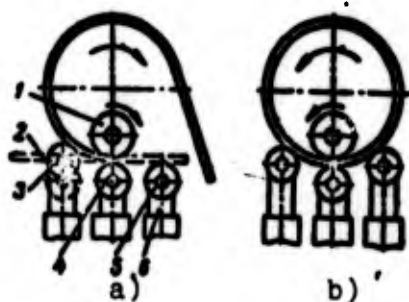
Diagram of the operation of a profile bending machine: 1 - drive roller; 2 - billet; 3, 5 - bending rollers; 4 - support rollers; 6 - rod of the hydrocylinder.
